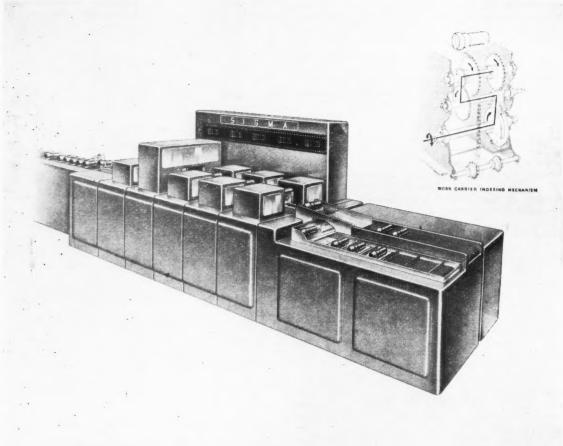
Multi-dimension transfer type inspection machine inspecting 59 dimensions on a complex part, and issuing punched card on which is recorded the measured size of each inspected dimension.
